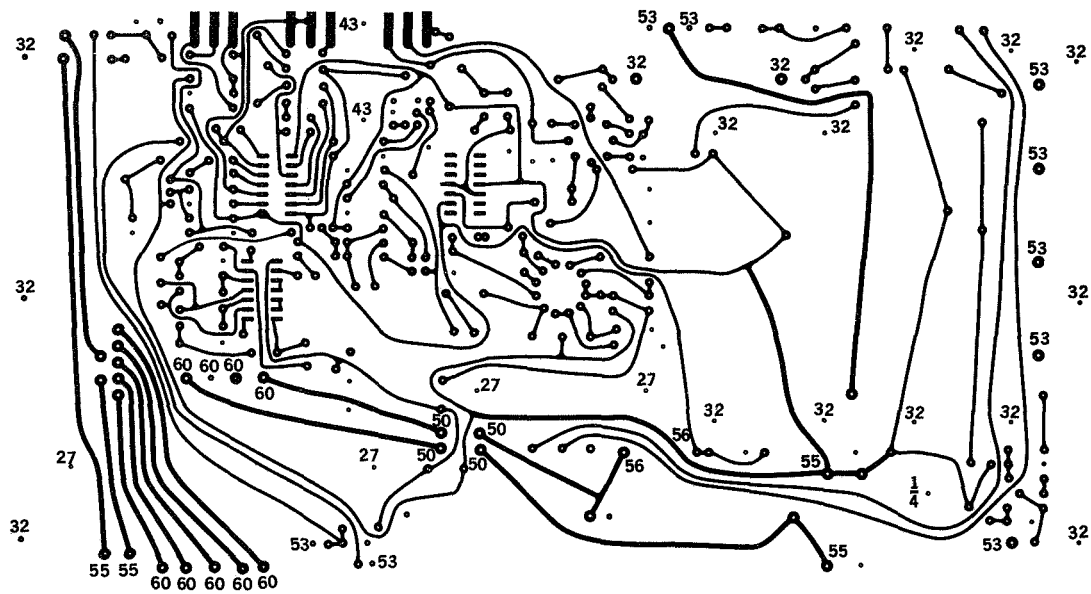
PRINTED-CIRCUIT DRILLING INFORMATION.
